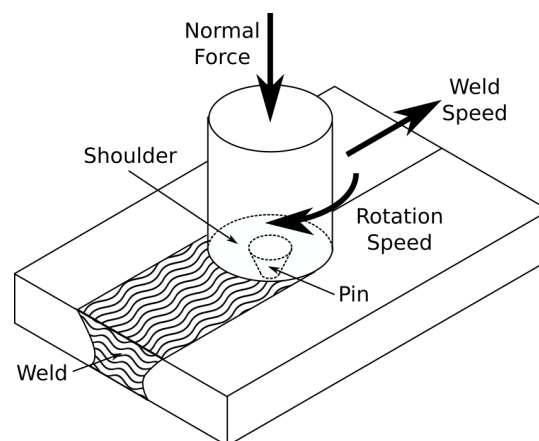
General friction stir welding process, the rotating tool (shoulder and pin) moves across the joint, mixing the material and forging with the frictional heat and pressure.
